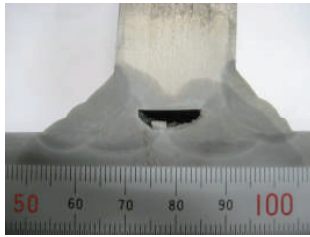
Macro cross-section of joint P with a root gap and welded by GMAW before the joint tensile test.
